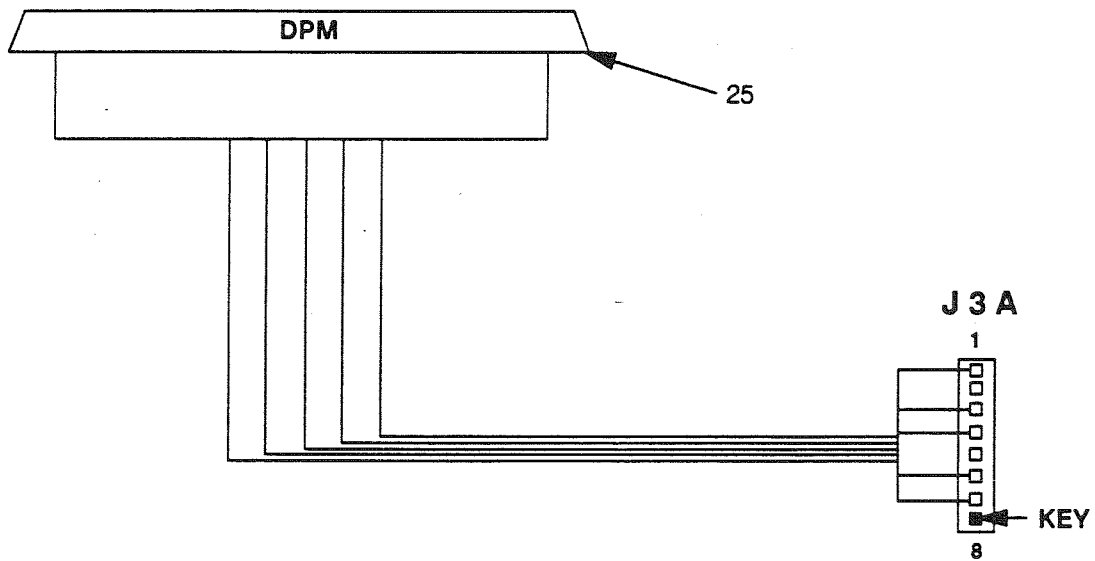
Feet Of Water Display Assembly Part No. 27788-303
